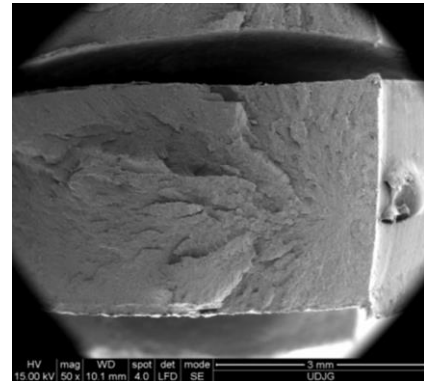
Appearance of impact fracture for a specimen of material G
